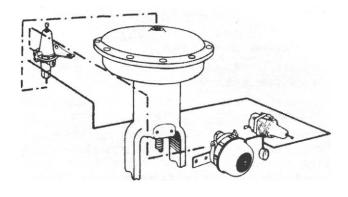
A trip valve actuated by pressure reducing regular outlet
